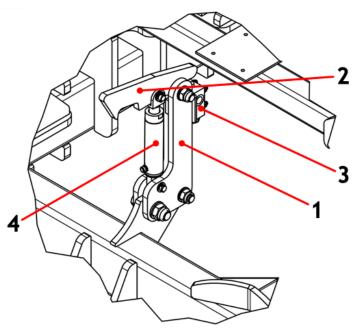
Main frame with automatic wing locking mechanism (1 - sheet metal of automatic locking assembly, 2 - hook of mechanism, 3 - limit valve, 4 - actuator)
